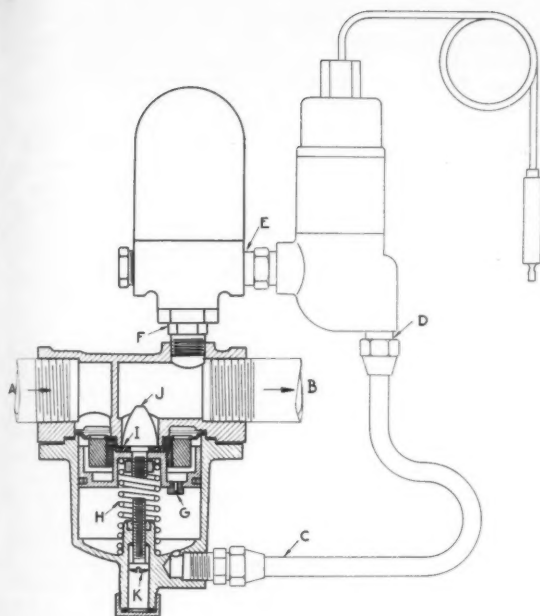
CROSS SECTIONAL VIEW OF THE CAPACITY BOOSTER VALVE WITH SOLENOID VALVE AND THERMOSTATIC VALVE CONNECTED IN THE PILOT CIRCUIT.
